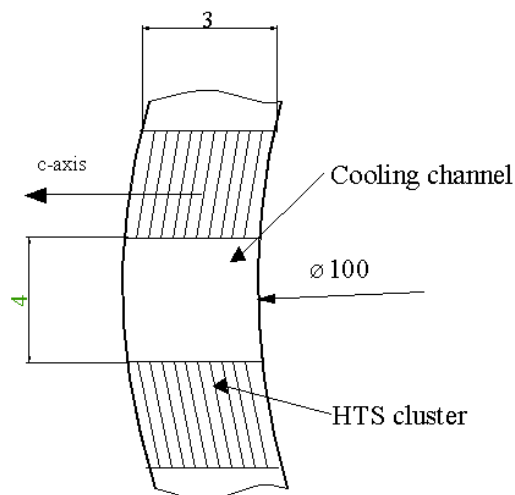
Sketch of the cooling channel in the lead's assembly.
